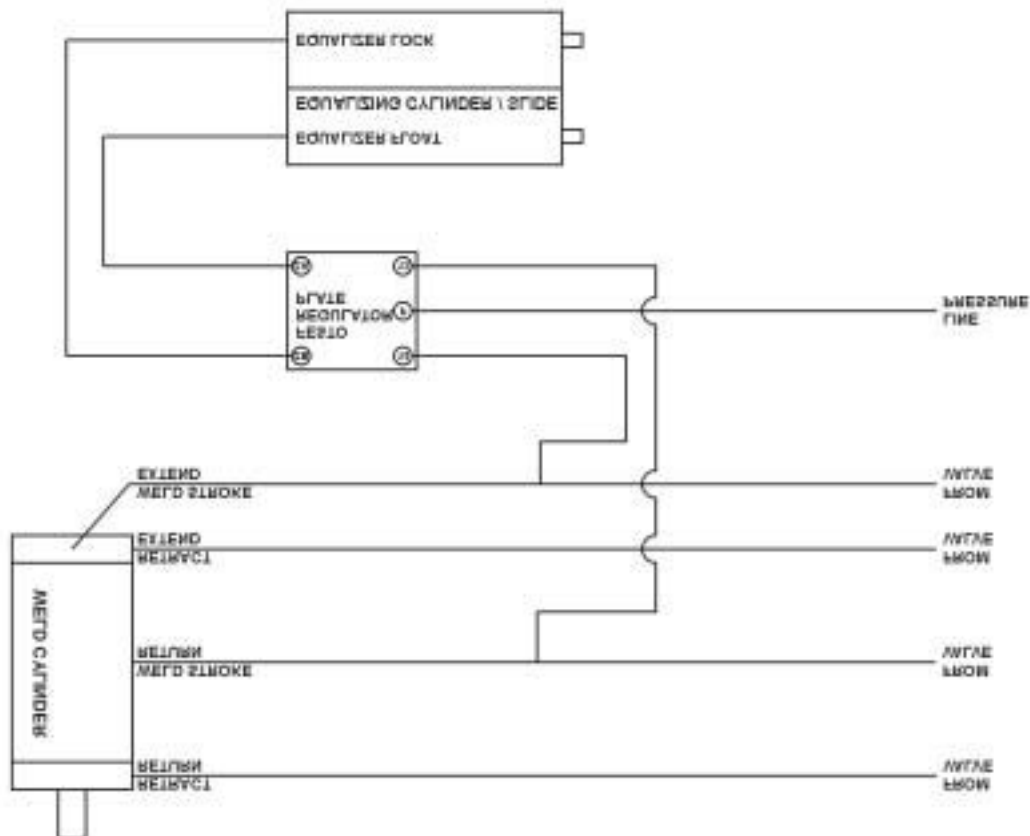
Robot C-Type 4 Port Retractable Air Cylinder Utilizing A Single Air Slide Or Air Spring Cylinder And Requiring Festo Regulator Plate
